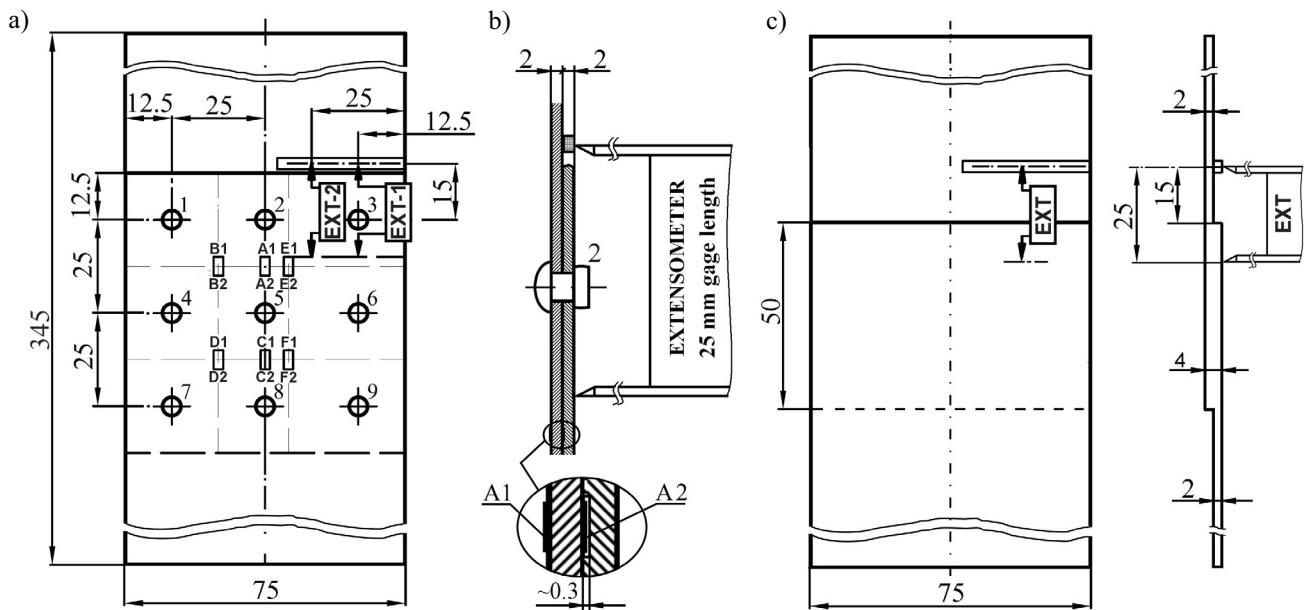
Specimens for rivet flexibility and load transfer measurements: a) riveted specimen; b) extensometer and strain gauge locations; c) dummy specimen
